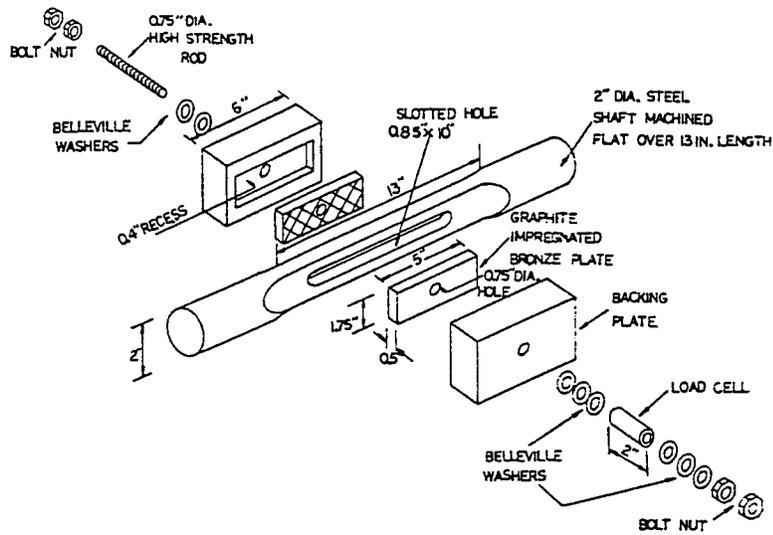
Friction Dampers; (a) External and Internal Views of Energy Dissipating Restraint (Nims, 1993)
